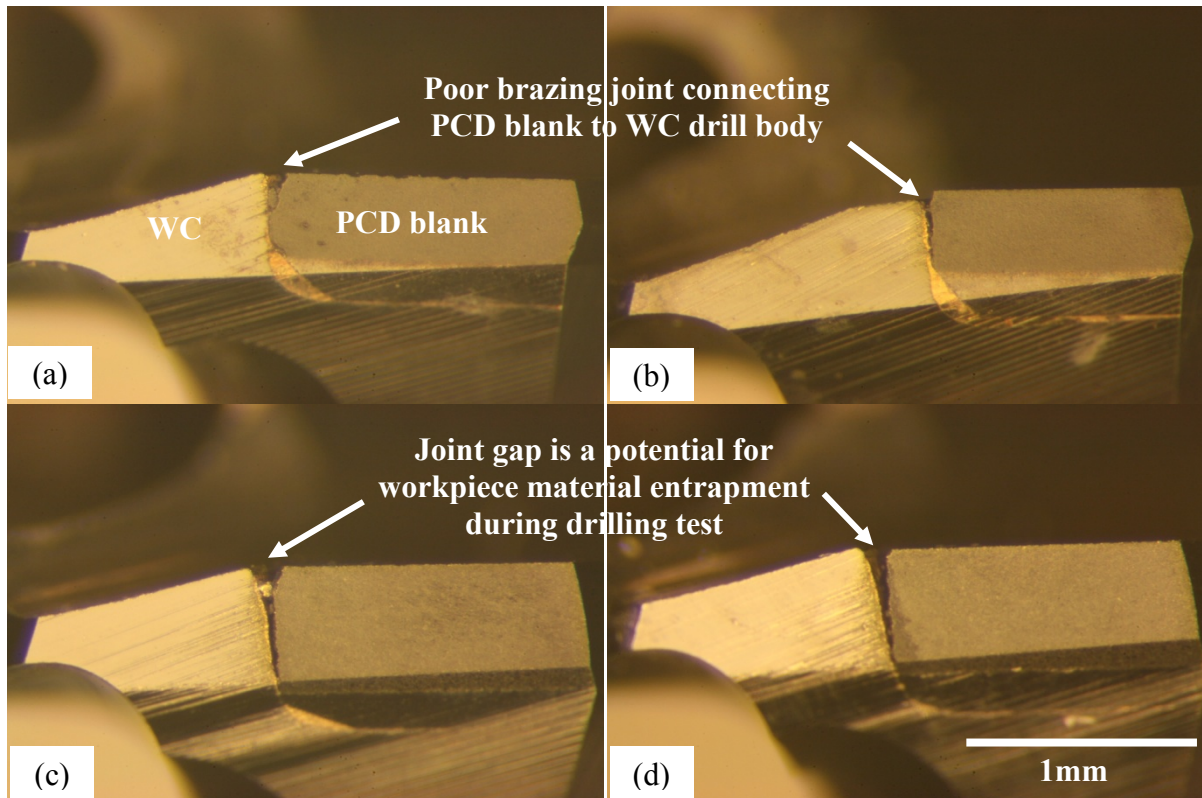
New/as-received condition of PCD drills used in (a) Test 5, (b) Test 6, (c) Test 7 and (d) Test 8
